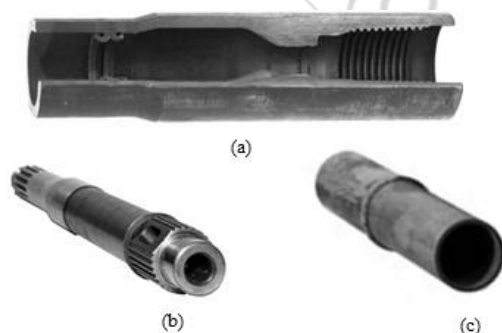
Some applications of friction welding process for hollow pipes/shafts: (a) Cross cut section of well drilling rod. Threaded end is friction welded to drill pipe body, (b) Marine prop shafts are an excellent bi-metal application. The wet-end is made from 17-4 stainless steel. The drive-end is sealed in the power transmission unit and is made from hardened 8620 carbon steel and (c) Join heavy wall tube to solid end to avoid extensive drilling.
